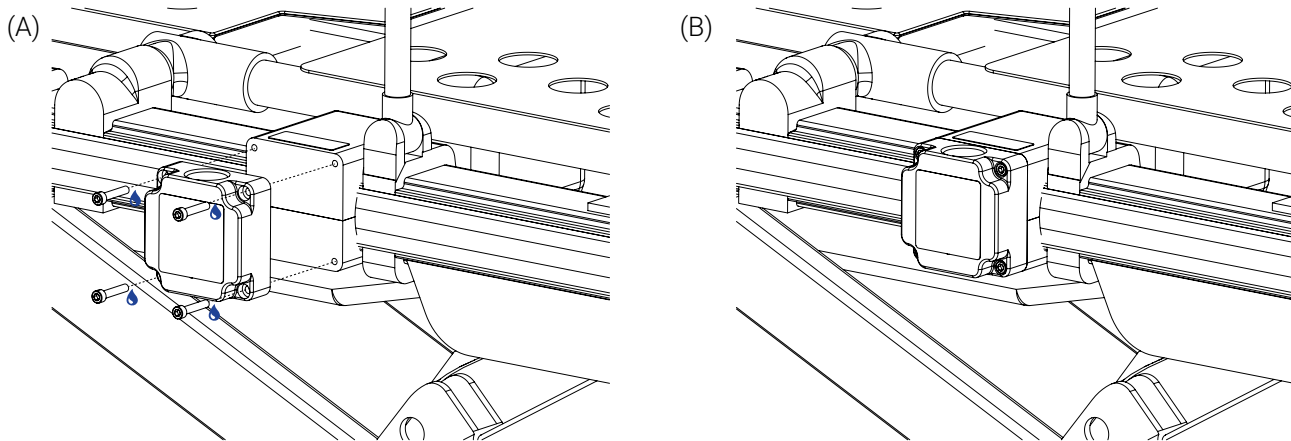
Installing the AP Socket on the PPXT FQS Clamp Block
